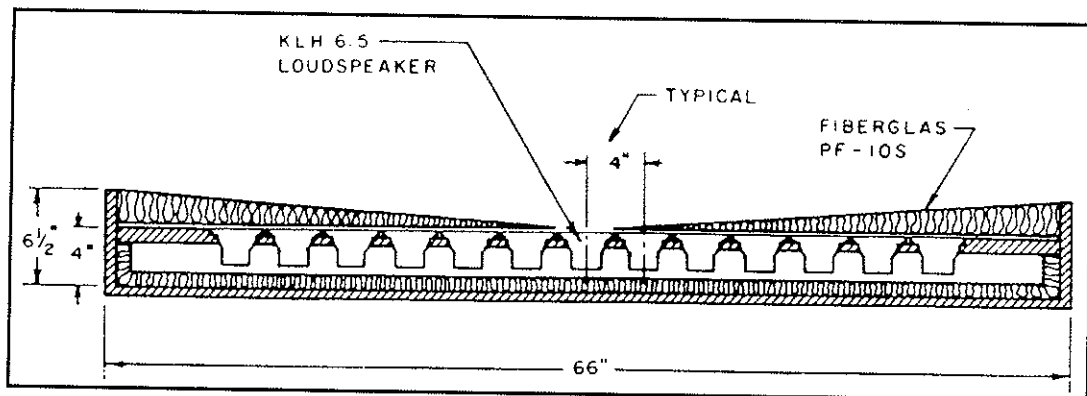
Mechanical tapering of column loudspeakers by use of fiberglass wedges. Drawing courtesy of Audio Engineering Society.
